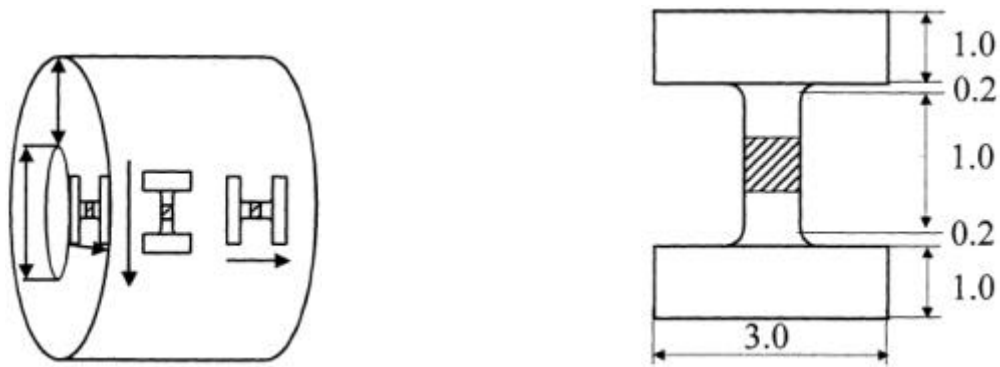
Schematic diagram of the machining in a Zr-2.5Nb pressure tube and the dimension of a small tensile specimen.
